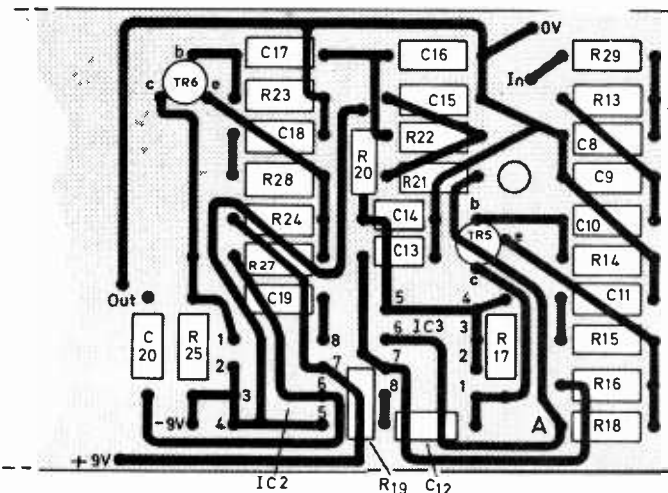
Component and track layout for the receiver printed circuit board. (Extra component spaces were originally for the intruder detector circuitry.)
